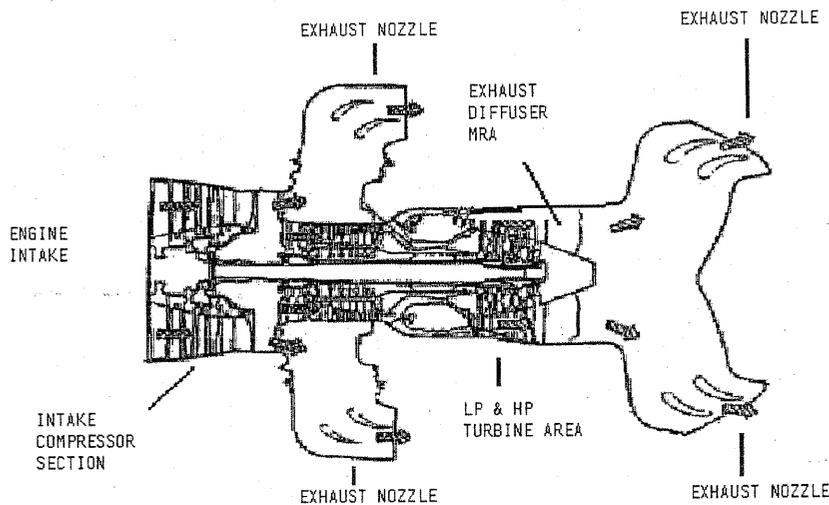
Overhead view of F402 Engine Assembly including Exhaust Diffuser MRA
